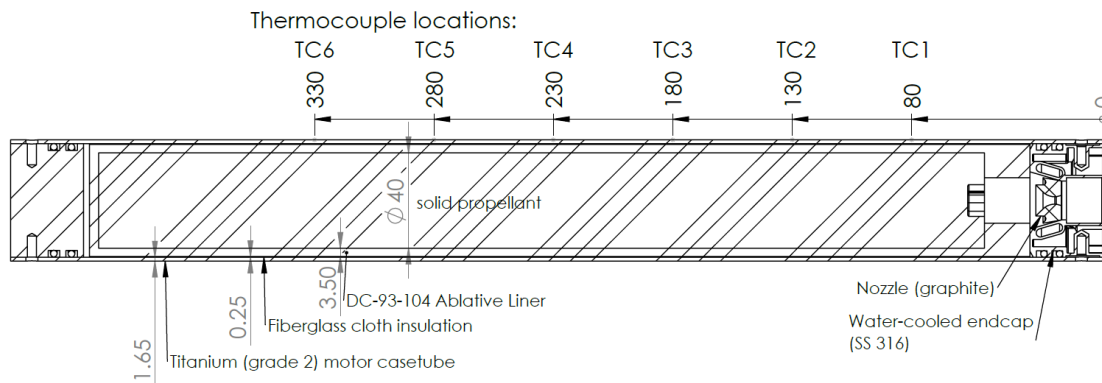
Thermocouple locations on the Ti Candle motor. Dimensions in millimeters.
